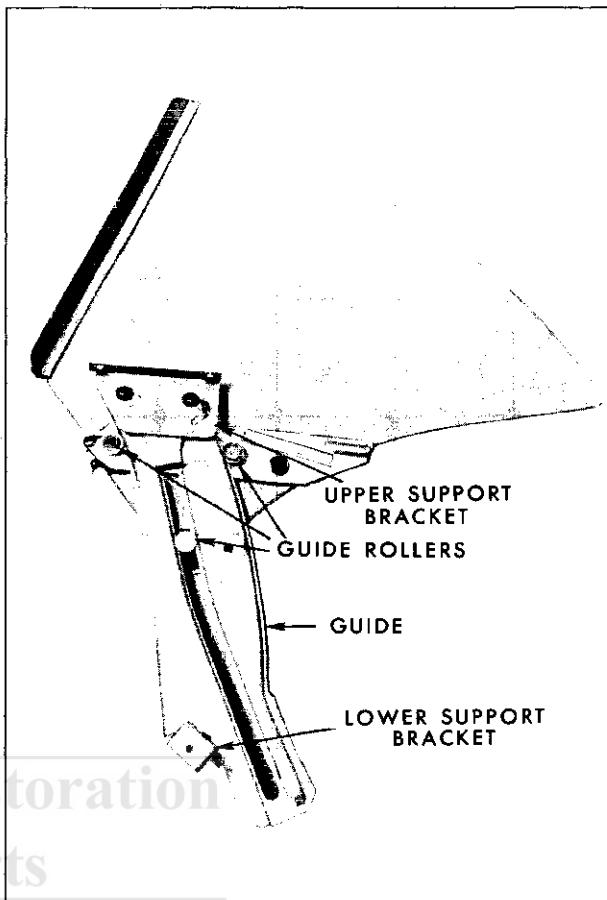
Rear Quarter Window and Guide Assembly "A - 37, 67, 87" - Styles
